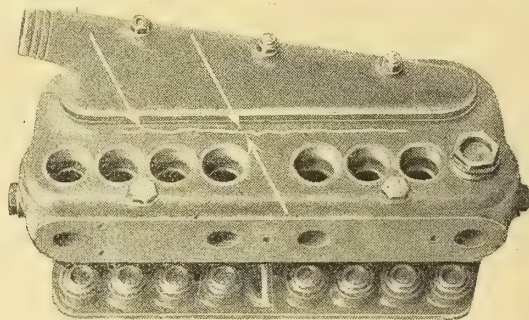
Four-cylinder Casting, fractured by frost, as indicated by the arrows.
